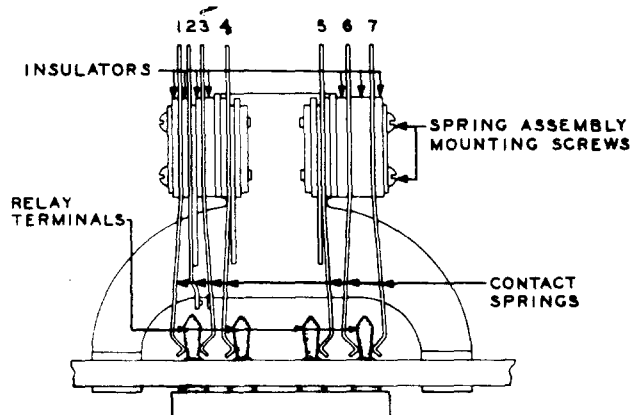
No. 26B Connecting Block With Two Spring Assemblies
